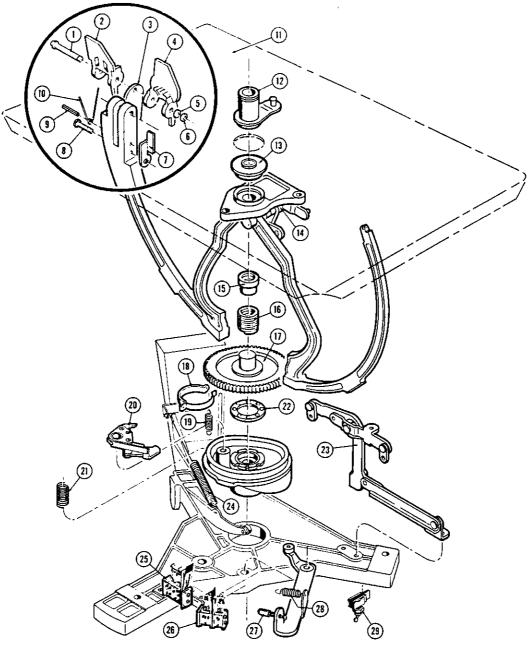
TURNTABLE SHAFT ASSEMBLY, RECORD CLAMP SHAFT, AND MOUNTING PLATE AND BALL BEARING ASSEMBLY
